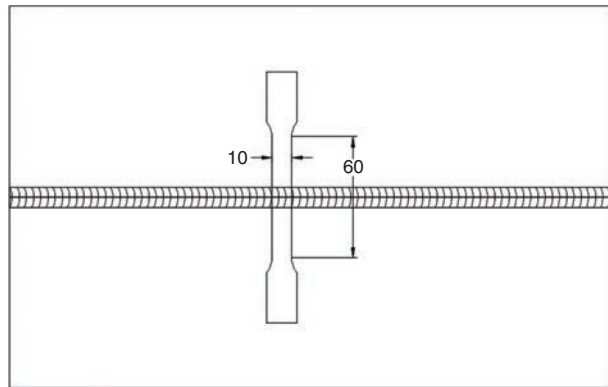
Welded plates and placement and main dimensions of the tensile test samples (only one sample is shown).
